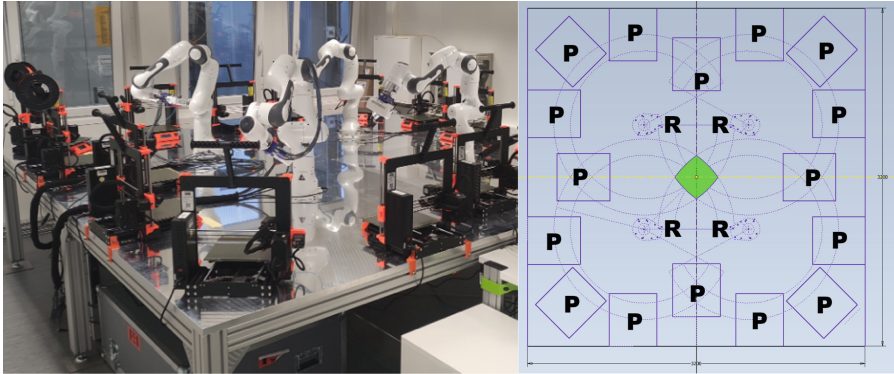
Demonstrator for flexible, scalable manufacturing; real-life setup (left), scheme of positioned participants (robots (R), printers (P); right)
